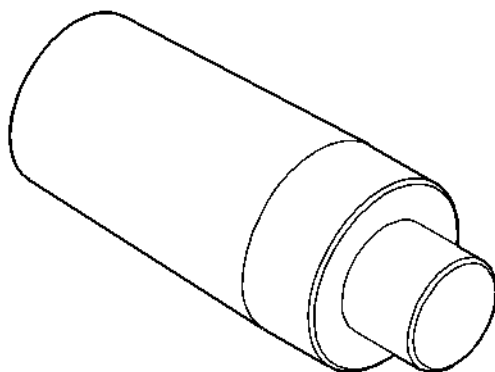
Piston & Rod Bushing REM/INST SET, J 1513-02
